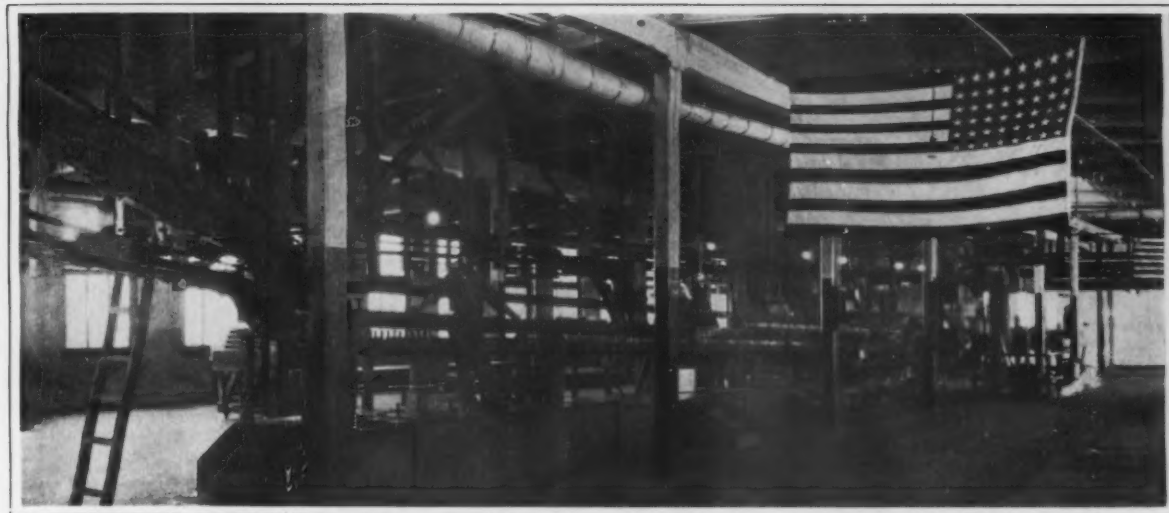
The Casings, Carried Beyond the Bases and Heads by the Length of the Drying Oven, Are Conveyed Back Over the Conveyors for the Smaller Parts, Then Descend to a Rollway Over These Parts
